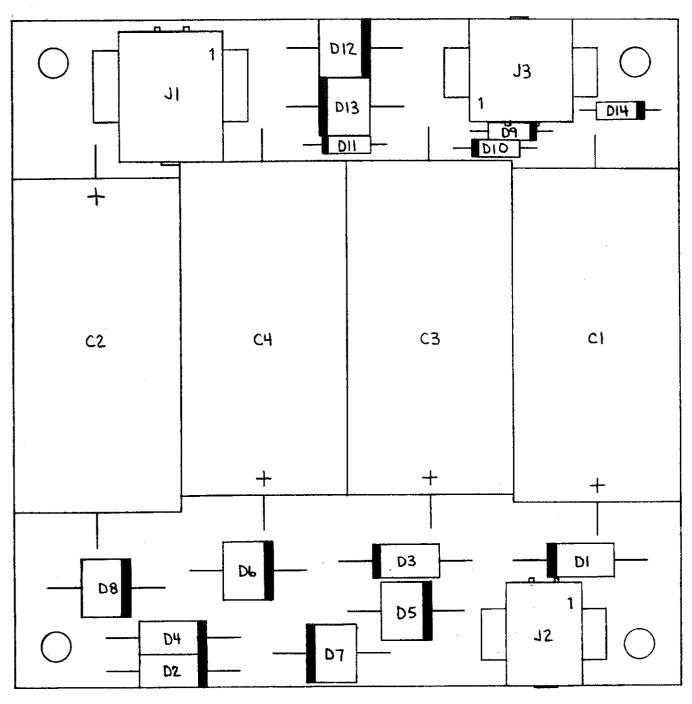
STATUS I/O CIRCUIT BOARD ASSEMBLY (AD919-0301)
